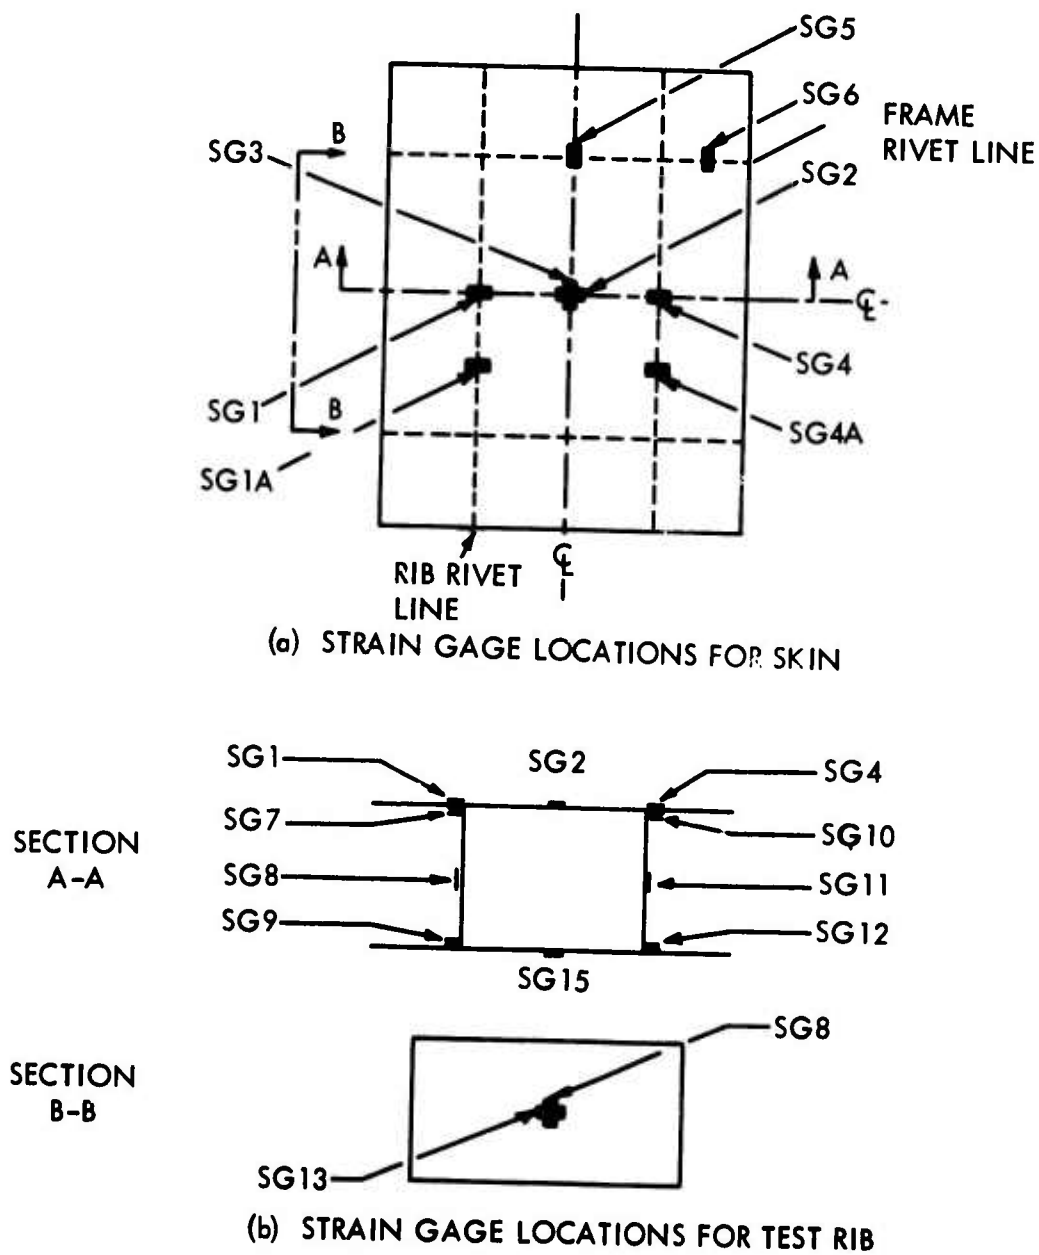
TYPICAL STRAIN GAGE LOCATIONS FOR BOX SPECIMENS
